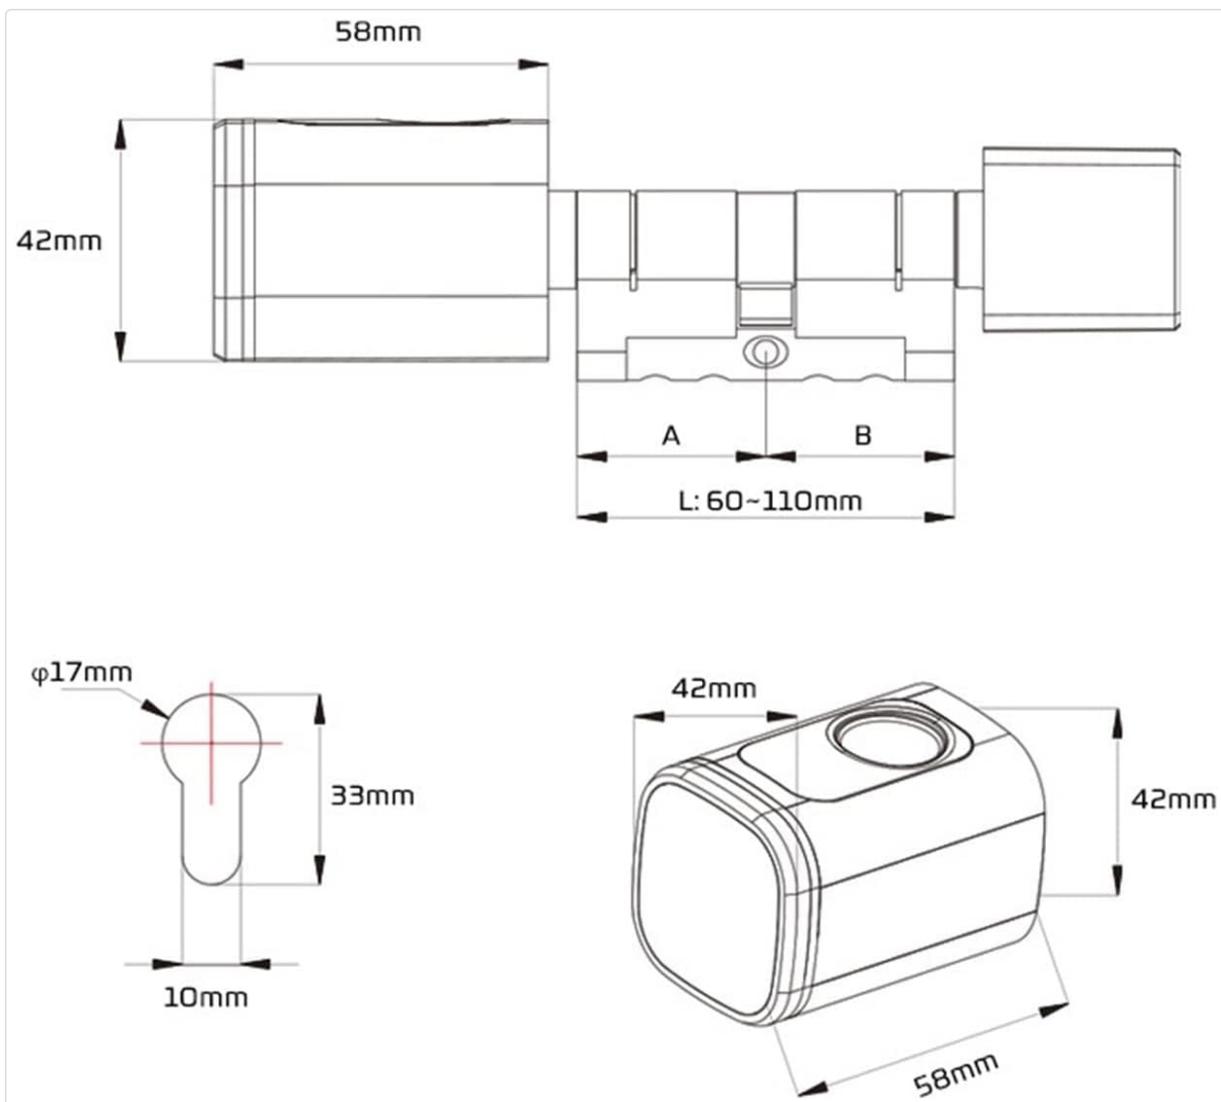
Technical specifications and measurements for the lock cylinder and keyhole, indicating an adjustable length range of 60-110mm.
